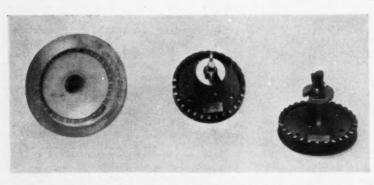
At the Right are Two Plastics Fixtures for Sub-assembly Operations on Rear Compressor Shafts. The Mould from which They were Made is Seen at the Left
